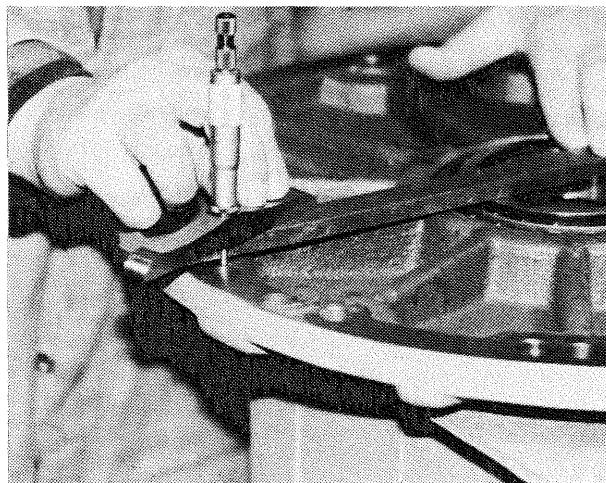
Drum Assembly & Installation (2 of 6)
